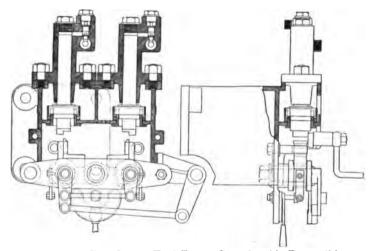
Beardmore Fuel Pump Gear for Air Reversible Engine.
